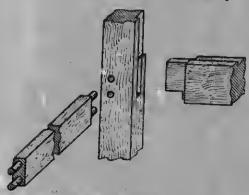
Joints of Side and Back Rails to Back Upright of Tiled Hall Ltand.
